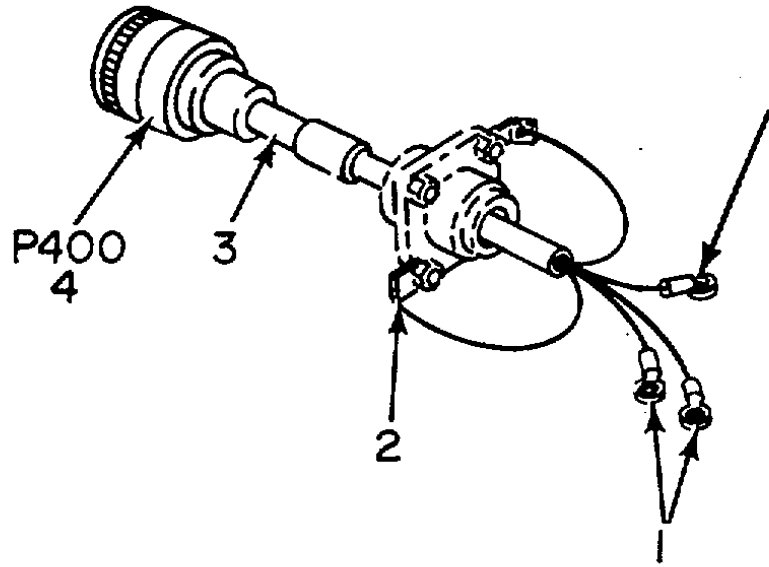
Adapter, Test MX-8839/ASM-417, Wiring Assembly.
